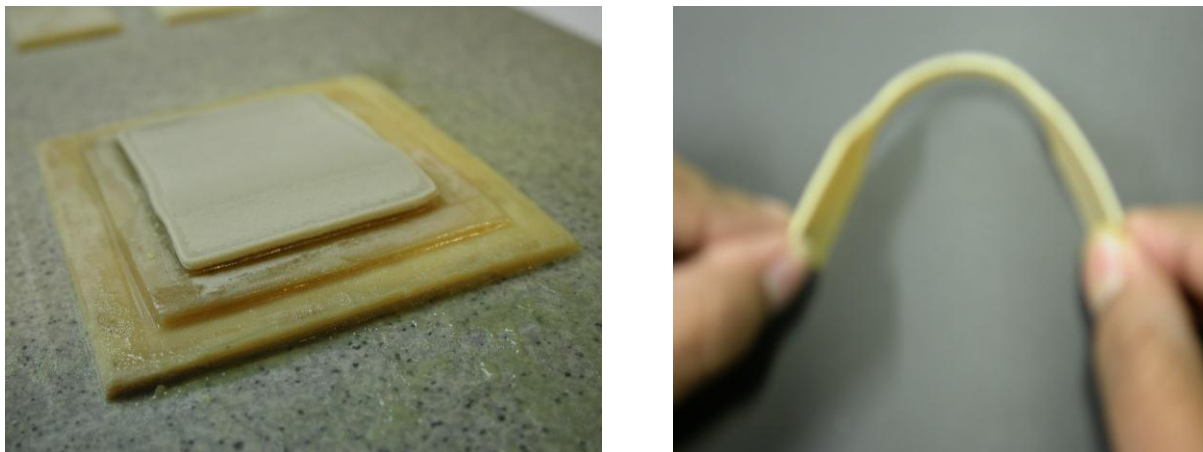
Printed samples with steps of Somos 201 (left) and Laser printed tensile test specimen (right)
